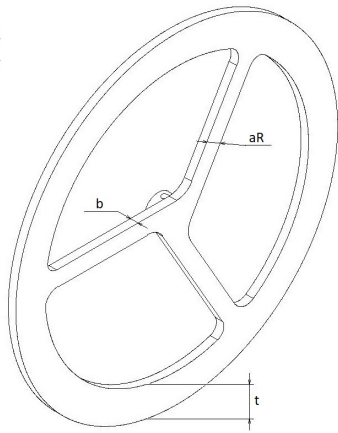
Reaction wheel isometric view showing spokes dimensions.
